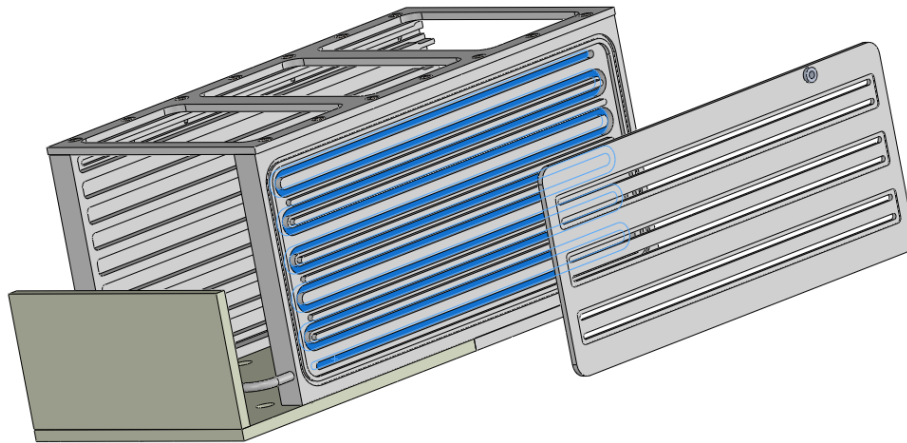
Schematic CAD views of the front-end electronics and cooling system
